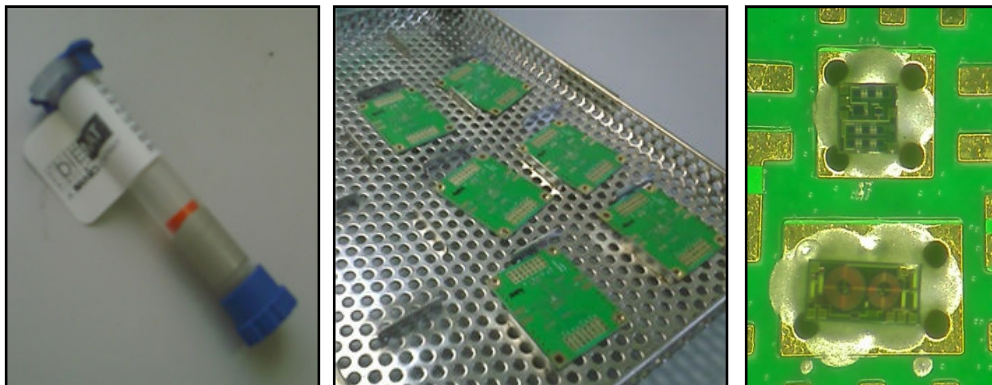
Diemat epoxy, curing process and attached dies on prototype board
